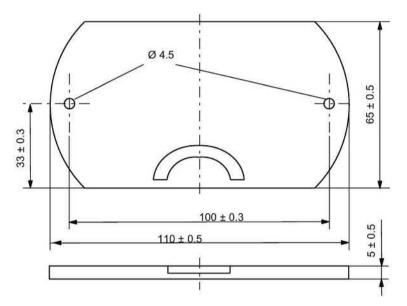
Dimension drawing of fixing pocket 6GT2390-0AA00
